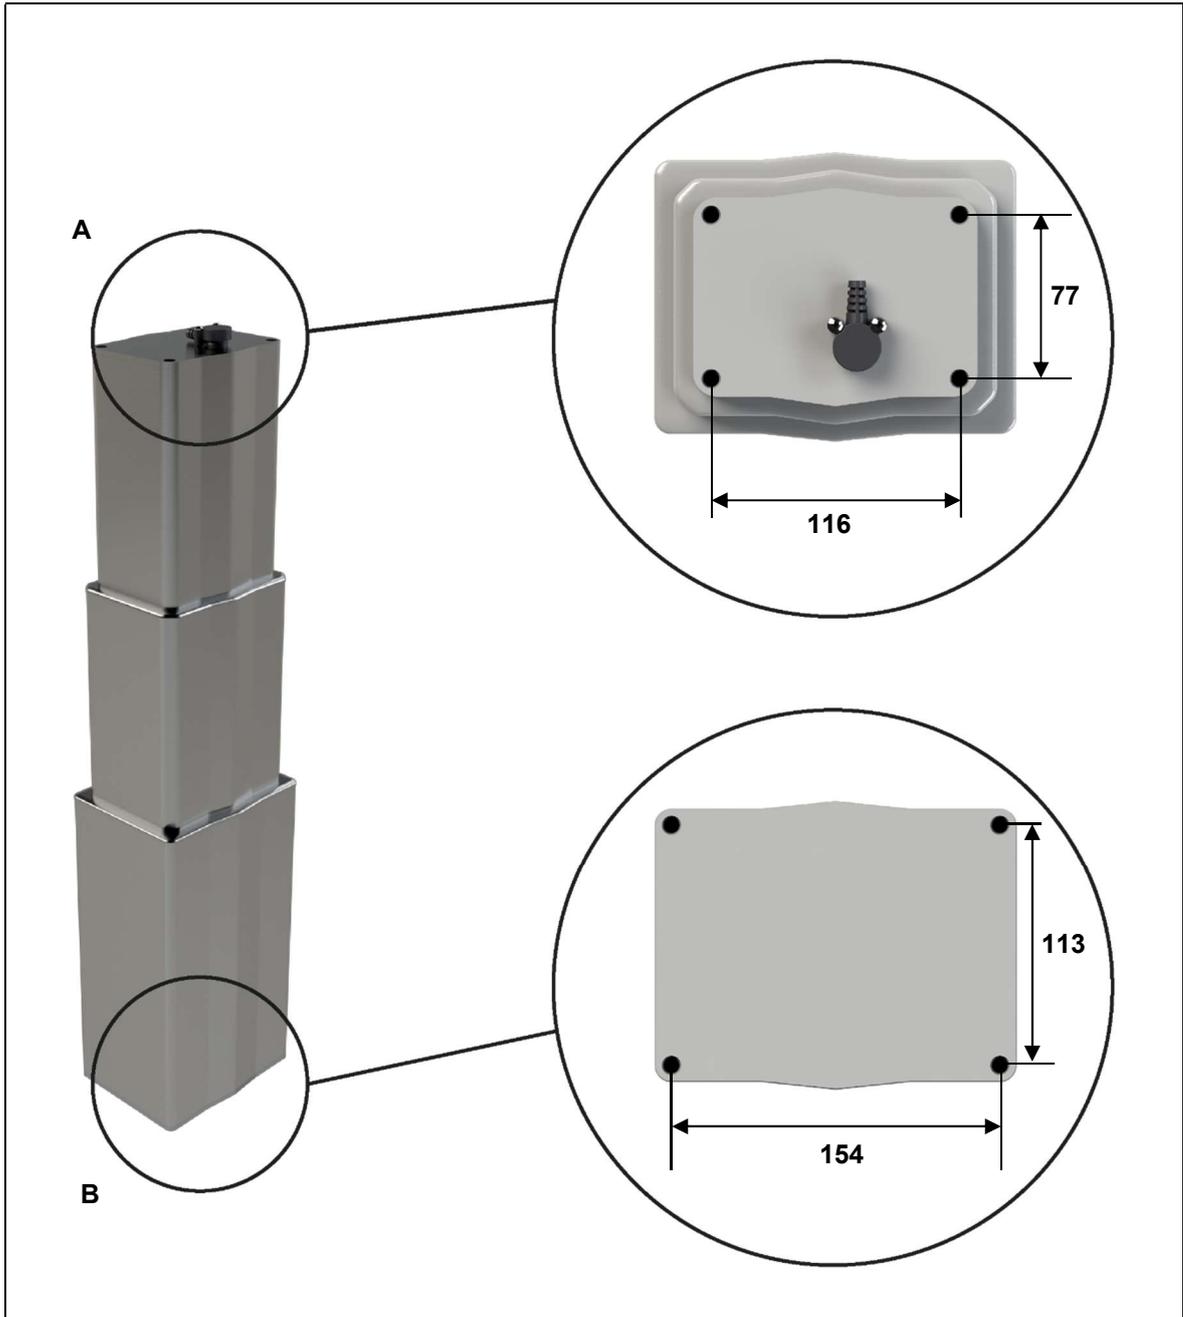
Mounting holes for the installation: Head and foot of DC20 lifting column (in mm)
